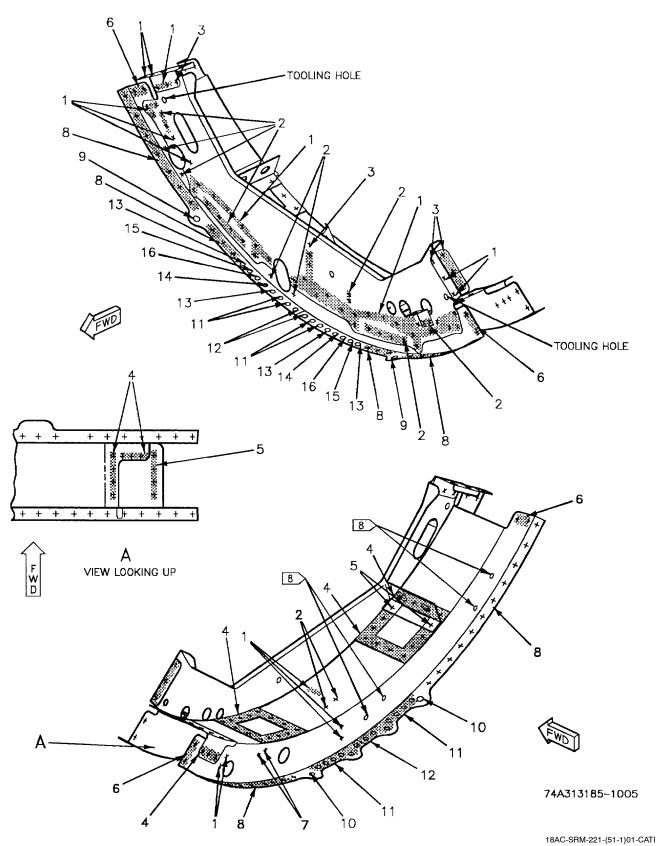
Former, 74A313185, Fastener Index (Sheet 1)
